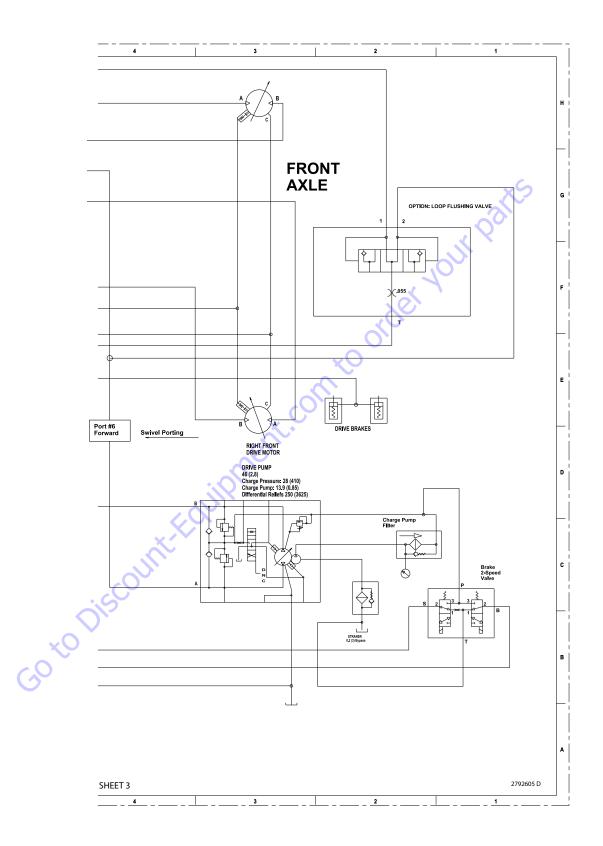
Hydraulic Schematic - Sheet 6 of 6
